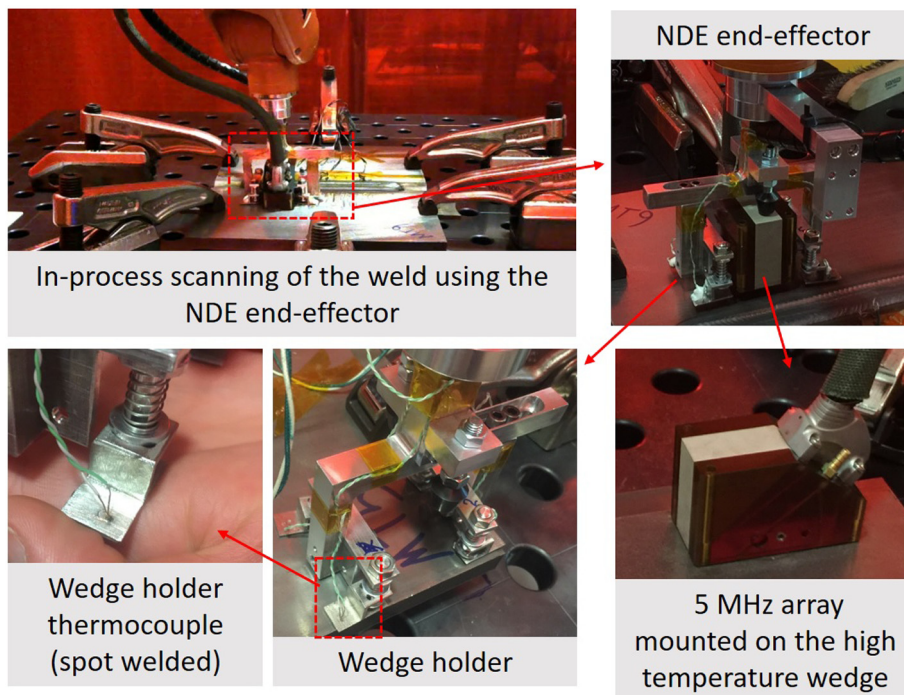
In-process scanning of the weld using NDE end-effector.
